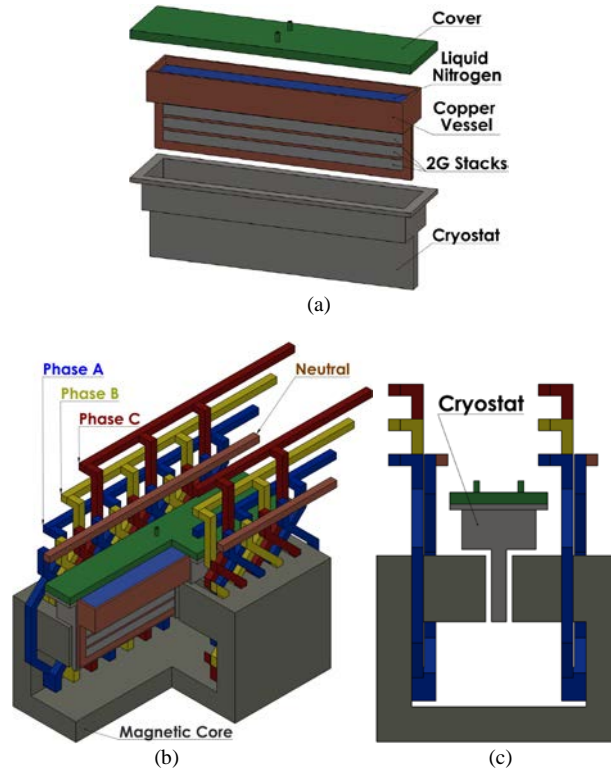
Schematic of the proposed linear motor: (a) Exploded view of the cryostat, (b) Isometric view with cuts of the three phase stator and cryostat, (c) Frontal view of the linear motor.
